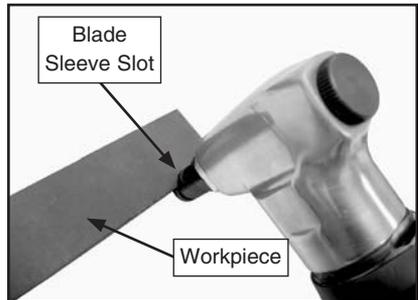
Workpiece inserted into the blade sleeve slot against the blade.
